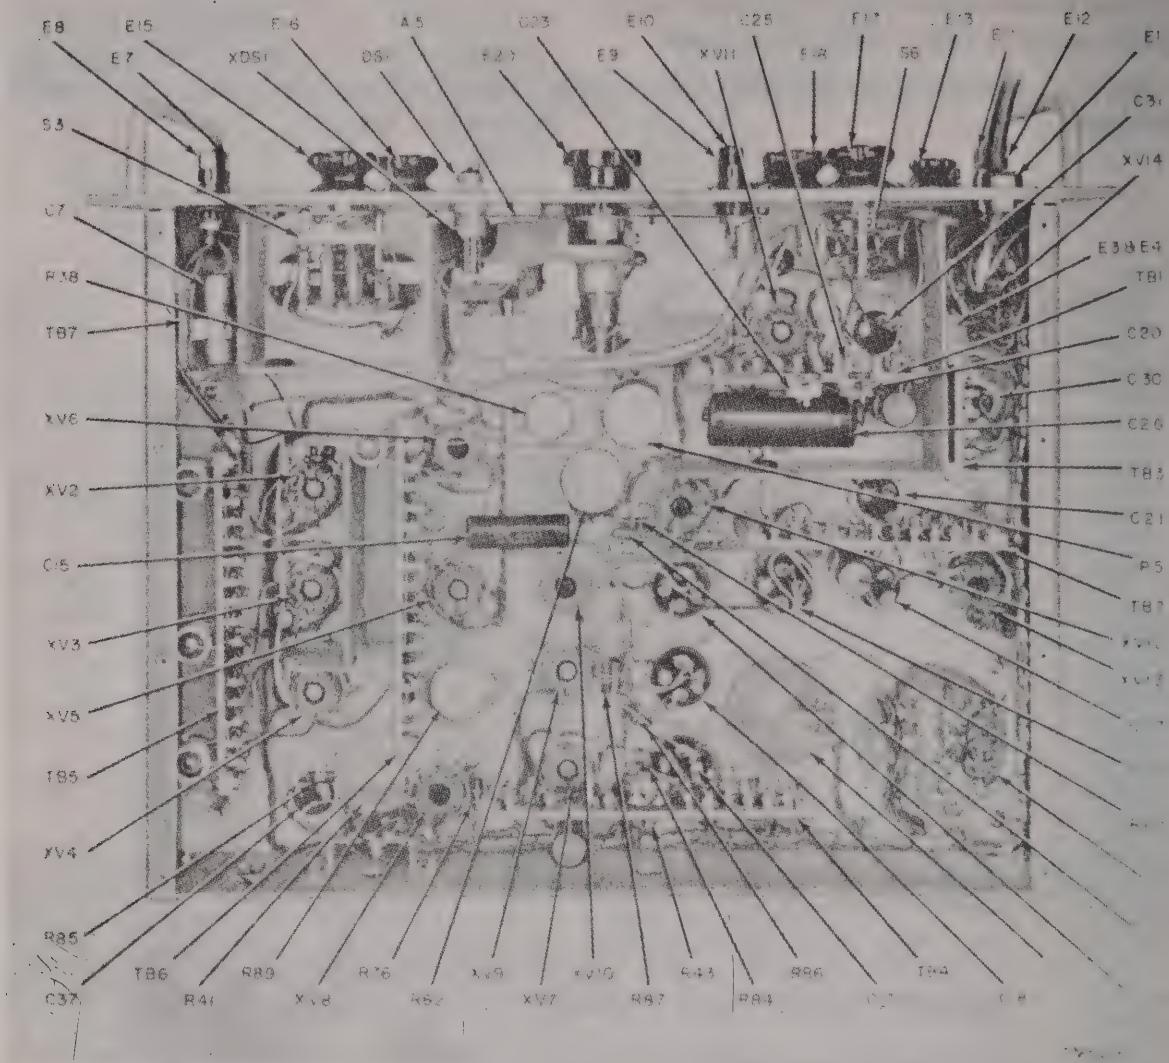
(Added) TS-723B/U, bottom view of chassis.
